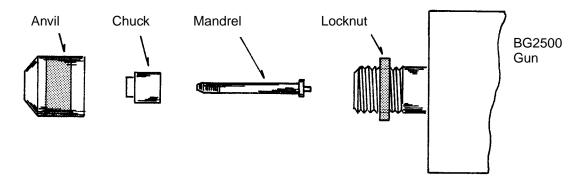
Assembly of Installation Tooling to BG2500 Gun
